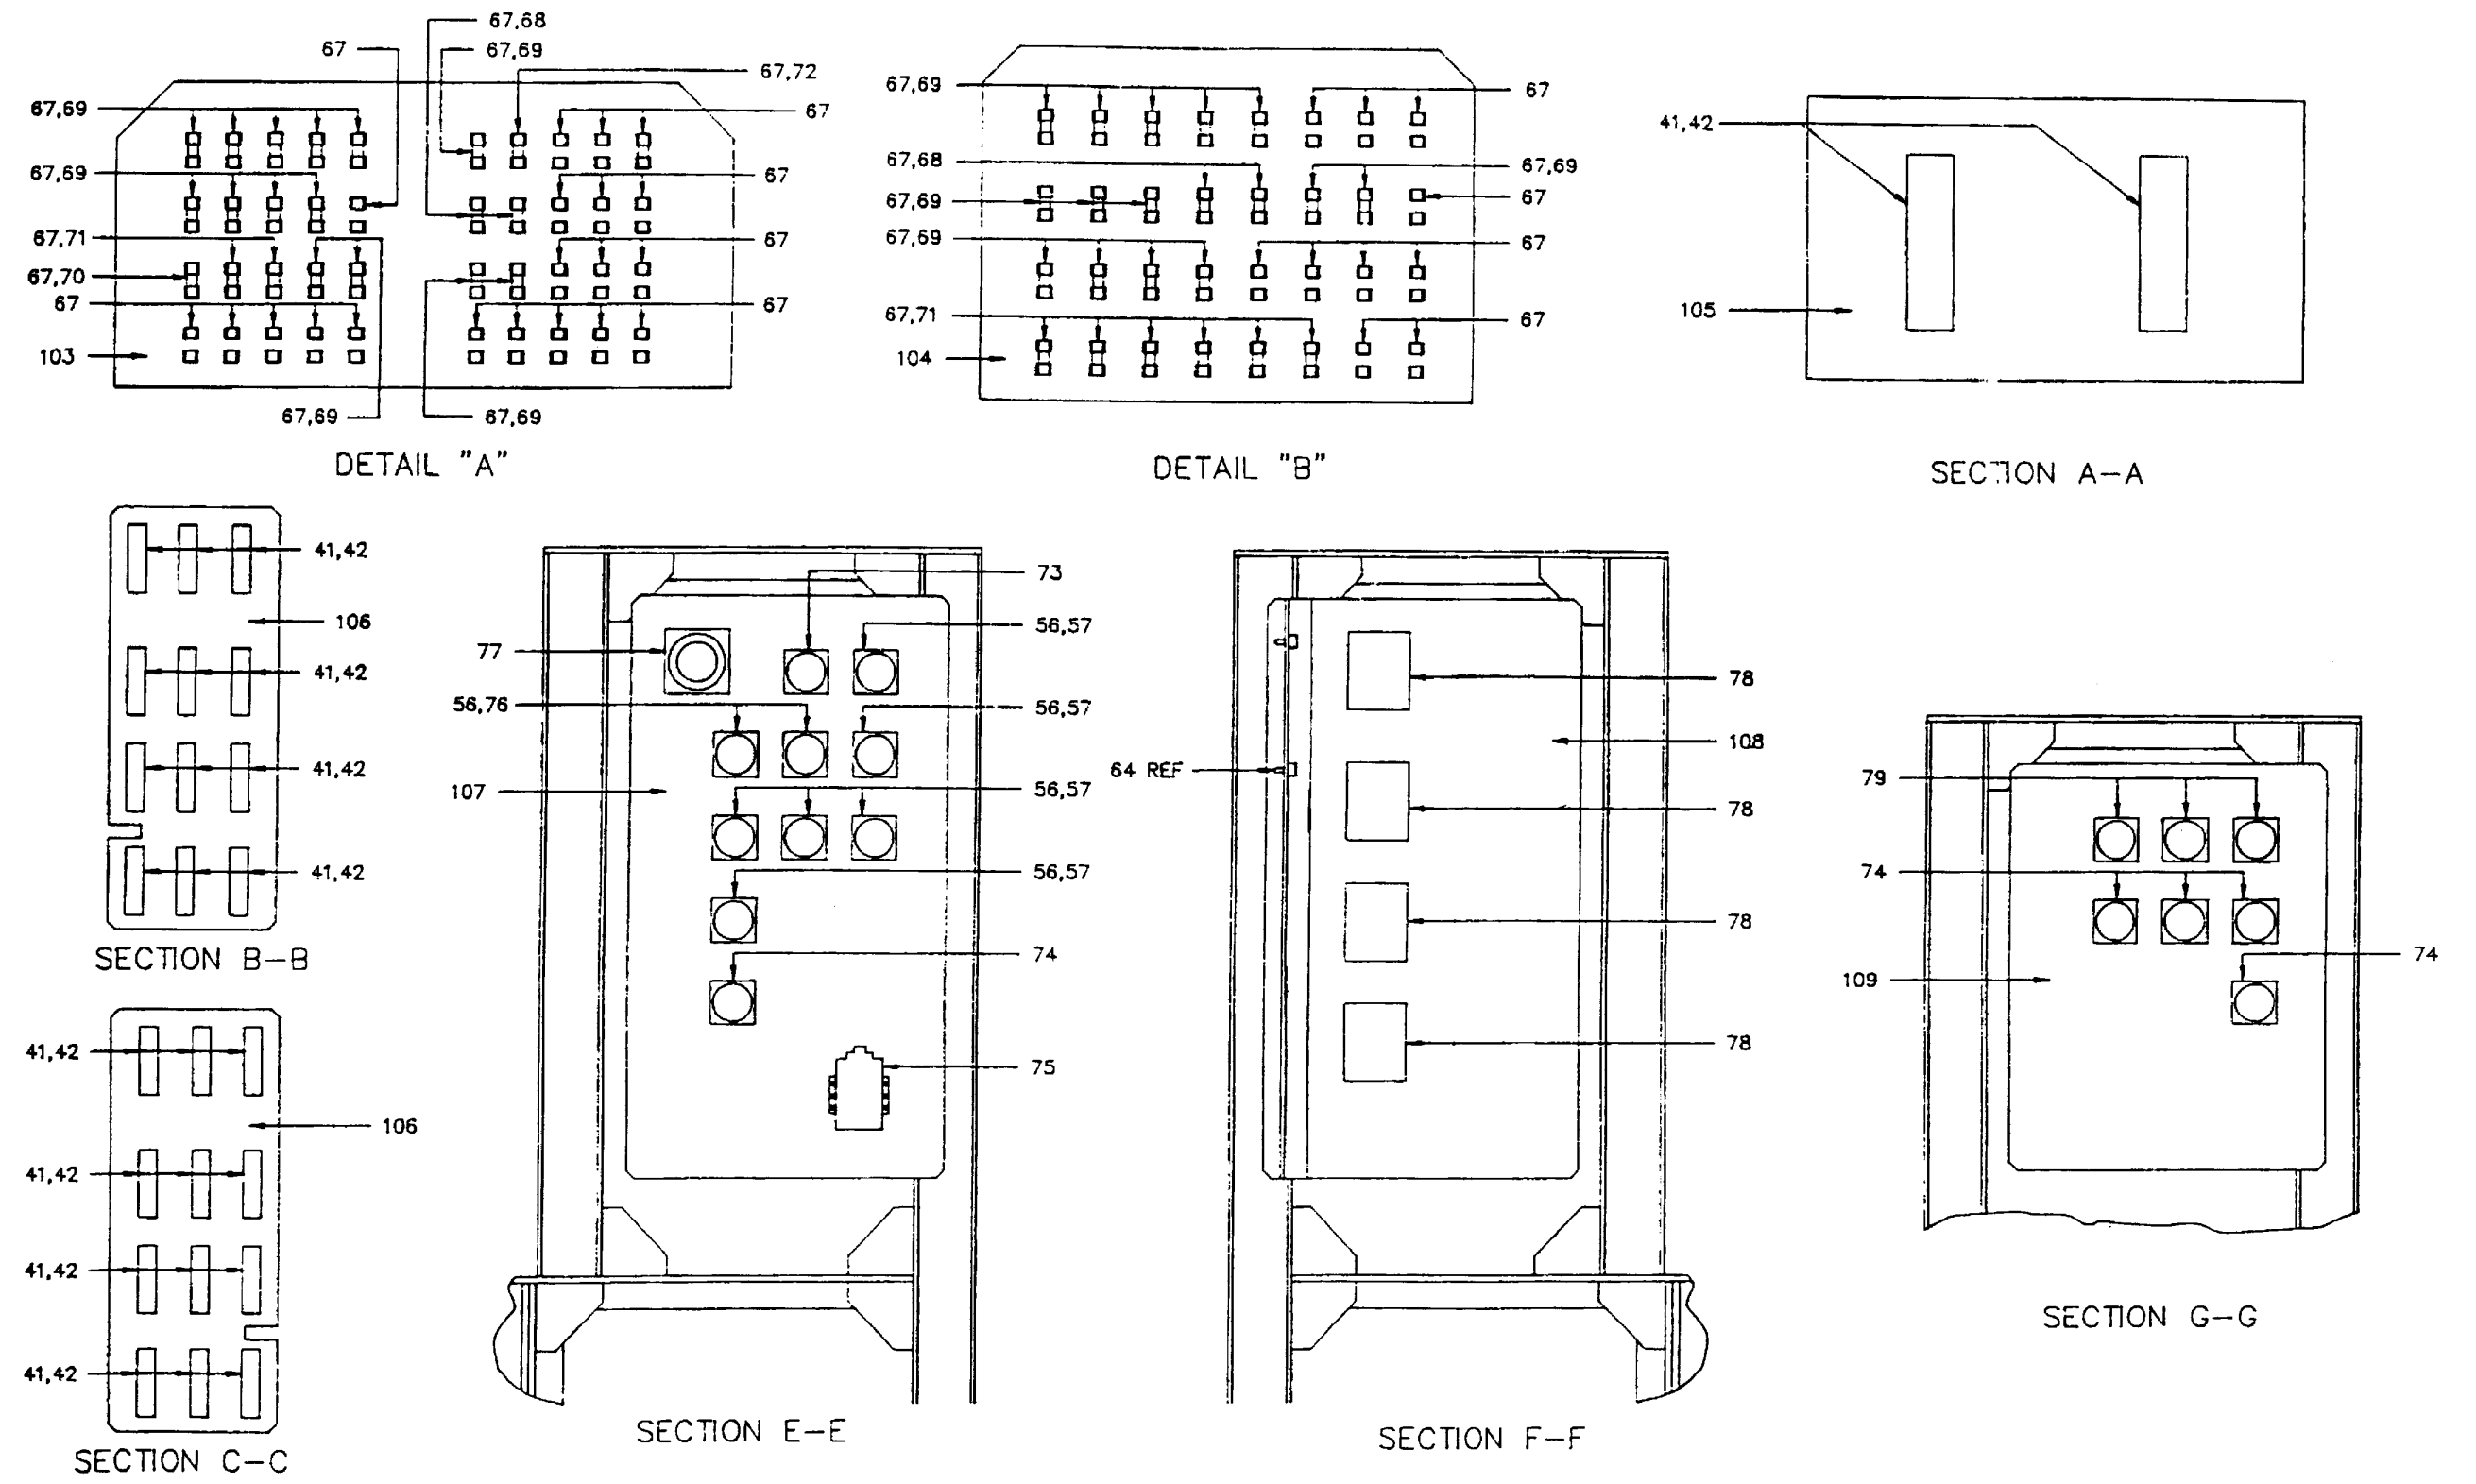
2SG Switchboard Assembly (Sheet 3 of 3)
